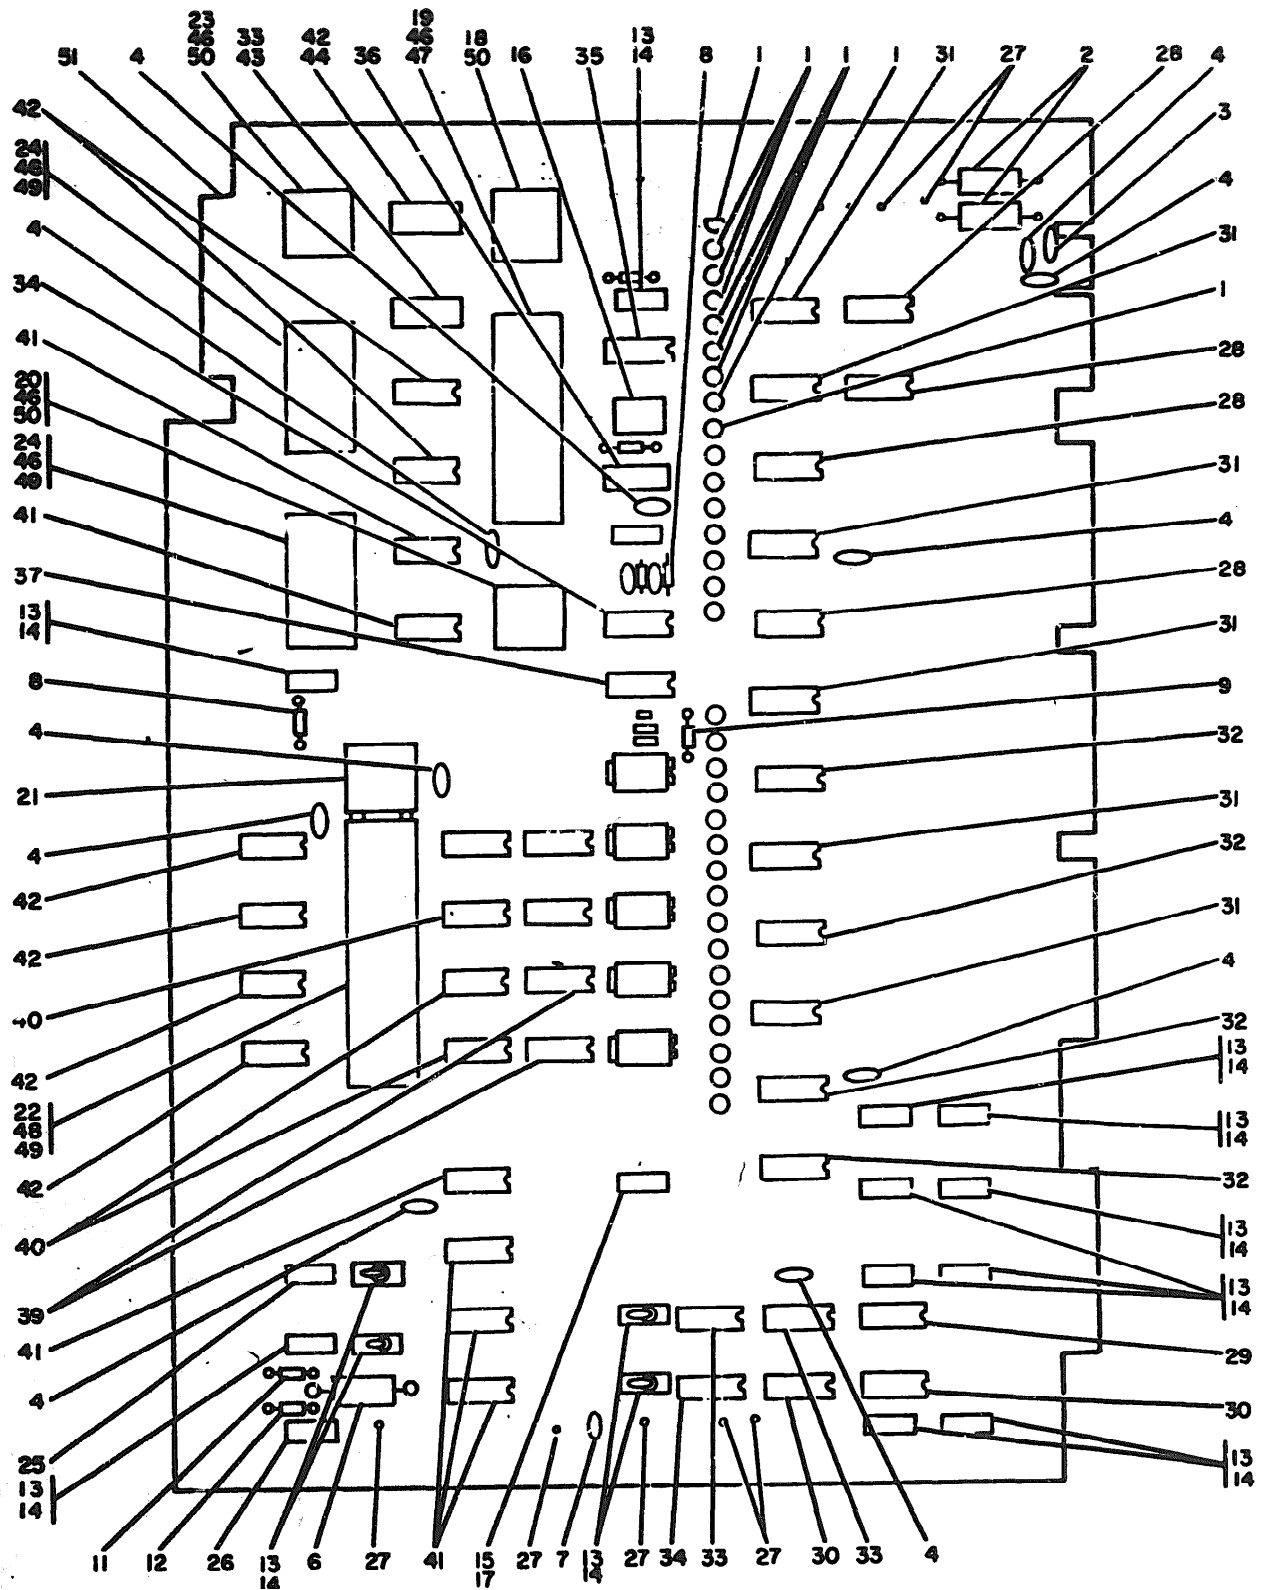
Control Circuit Card Assembly (Sheet 1 of 2)
